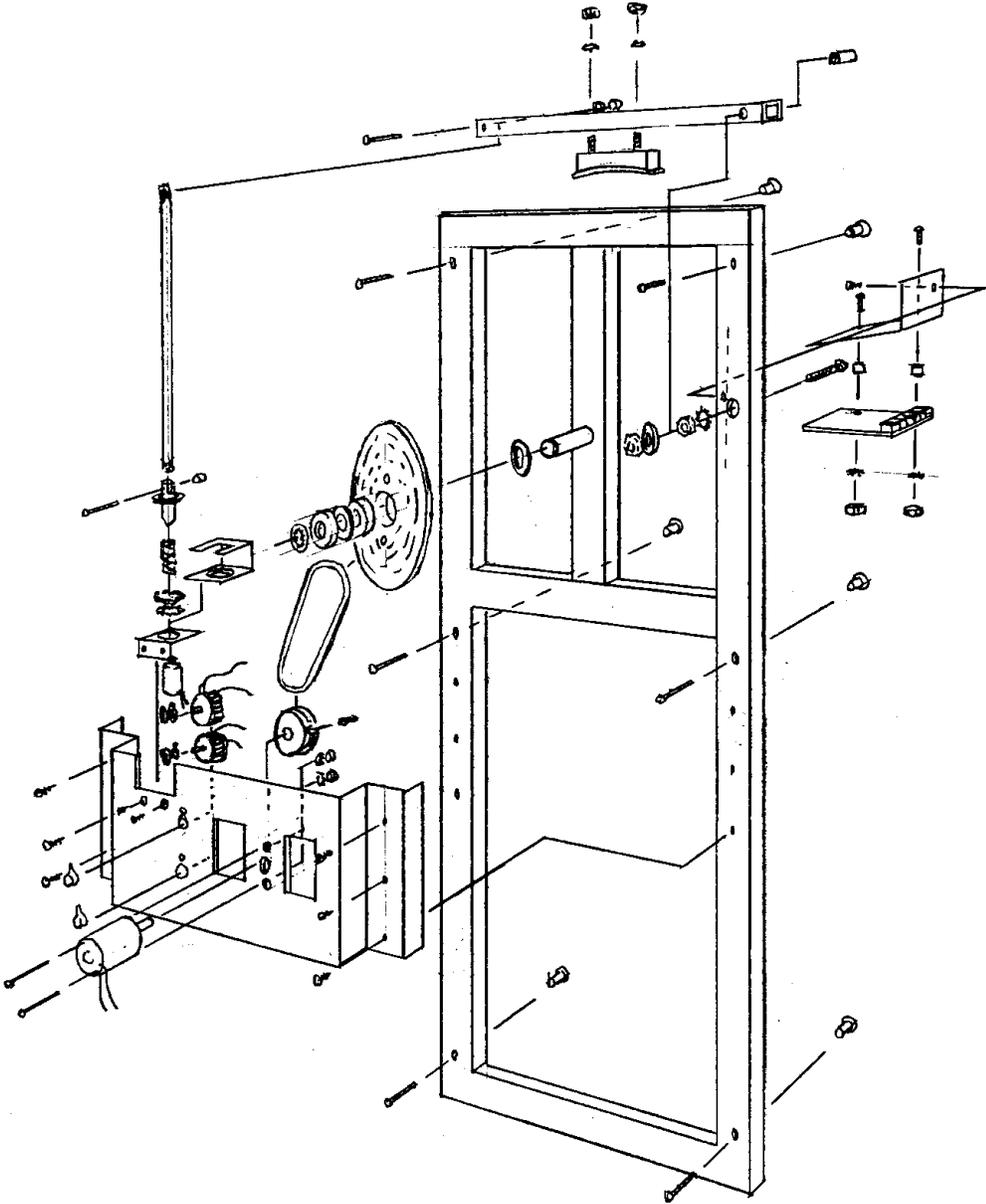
Motor, Brake, Encoding Wheel Assembly Drawing #1
